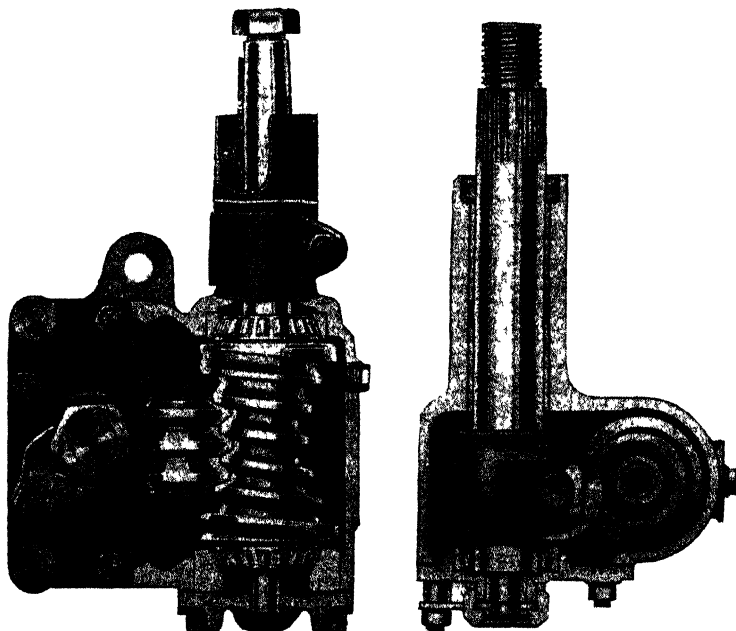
GEMMER WORM AND ROLLER-LEVER STEERING GEAR.
